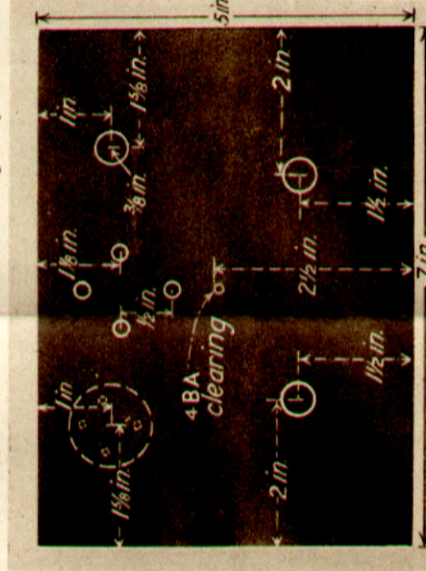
Dimensions of the valve unit panel marked out for guidance in drilling
